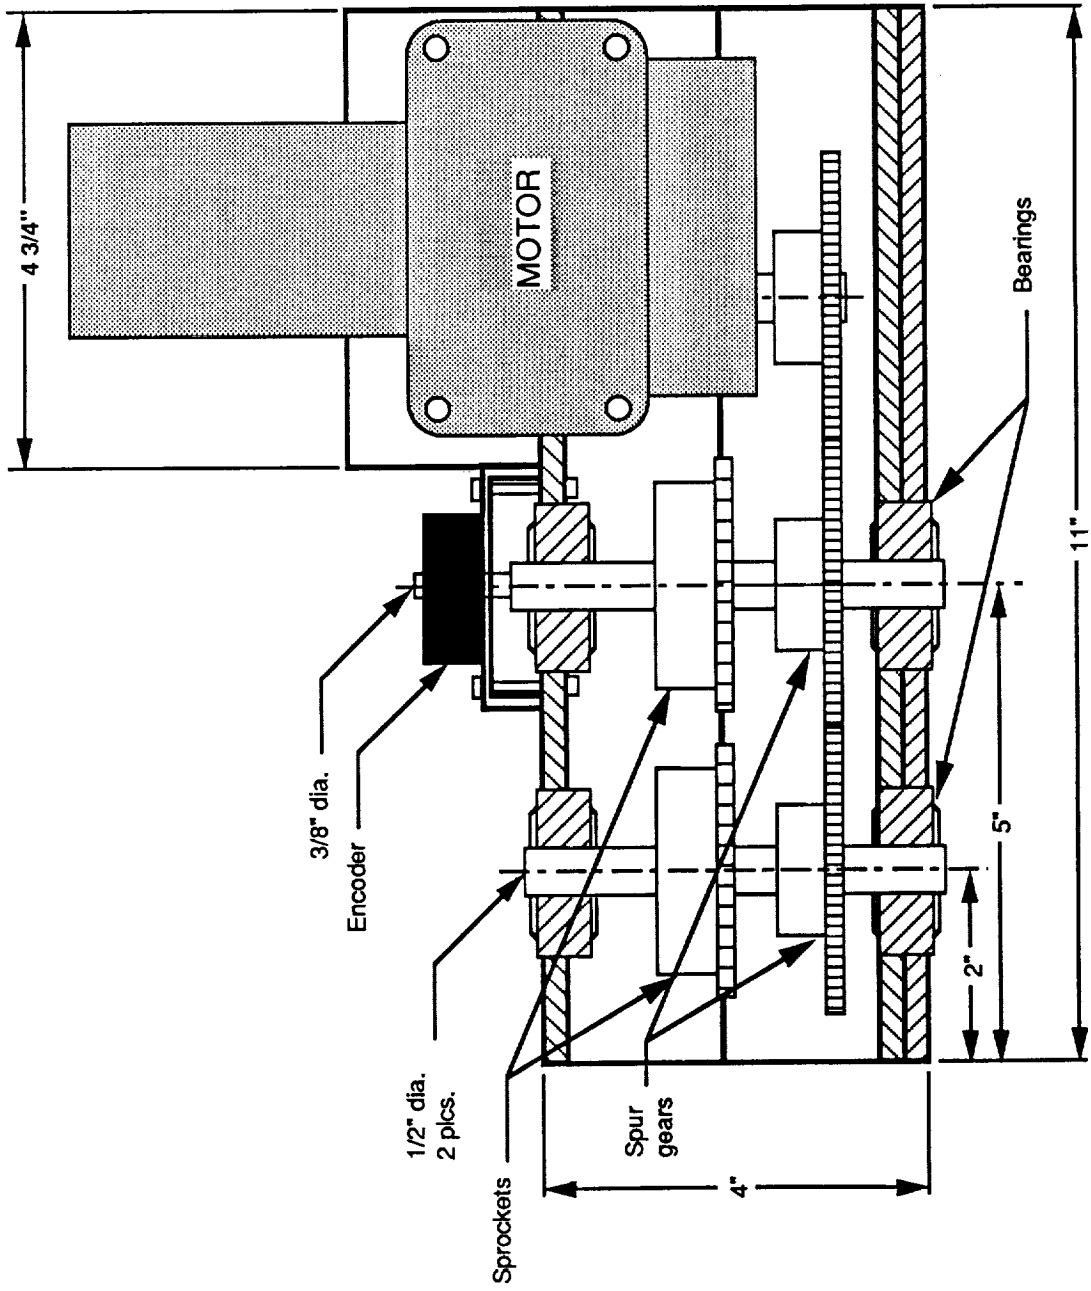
GEARBOX ASSEMBLY (FACE AND SIDE VIEW)
